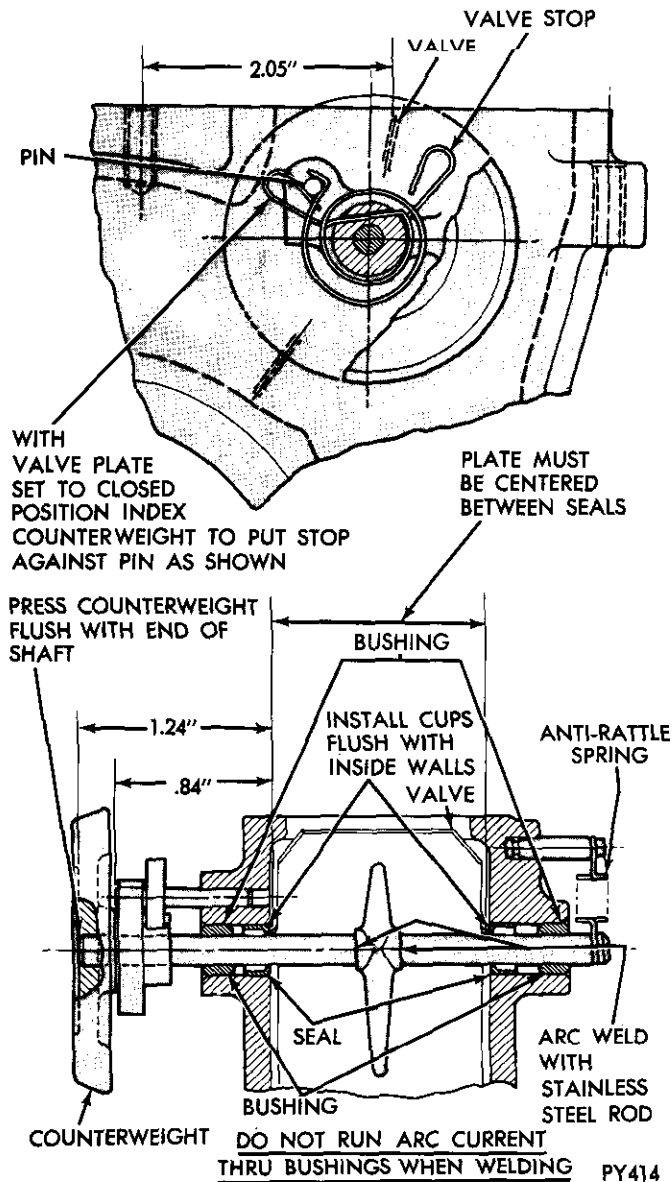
Proper Manifold Heat Control Valve Installation, Six Cylinder Engines
